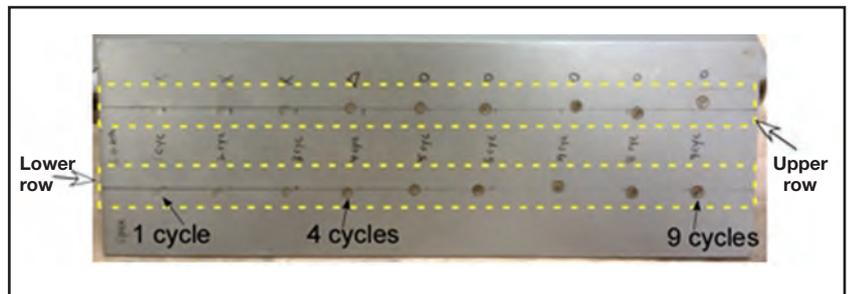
Test sample with two rows of resistance spot welds.
